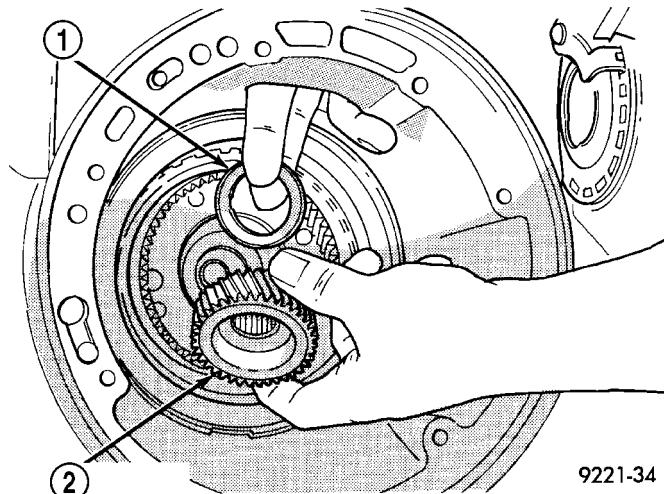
Remove Front Carrier and Rear Annulus Assembly
